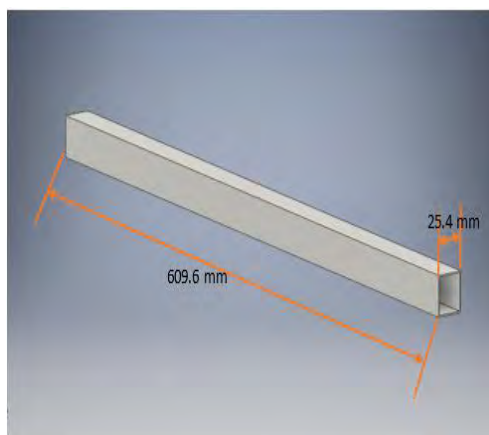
Geometric of straight shape Specimen 'S3' at a load of 8.45KN
